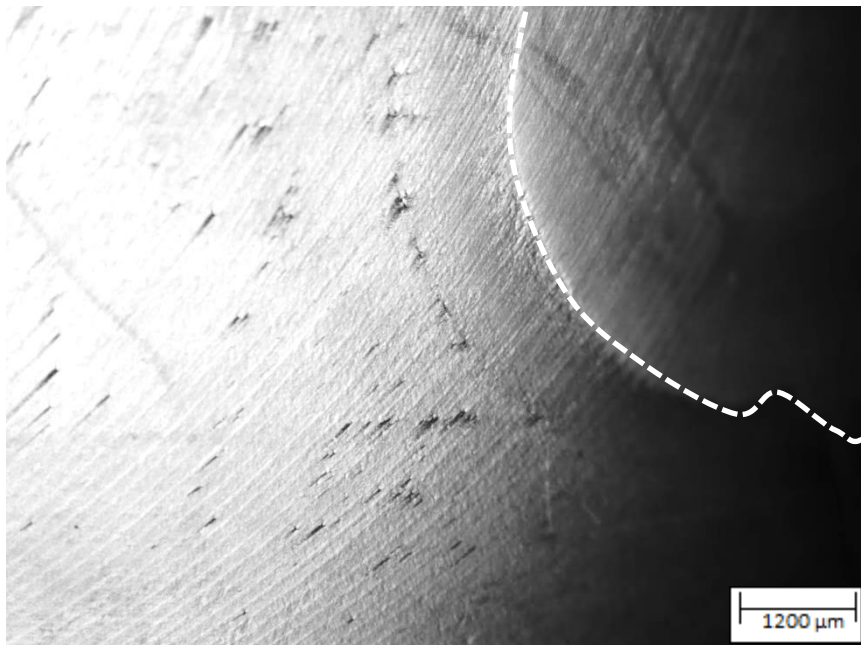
Stereoscopic image of the tensile surface of the bend test (See Figure 41) of sample 3 showing sub-millimetre defects adjacent to the original fusion line. Fusion line is demarcated by the dotted line and the weld metal is located in the top right of the image.
